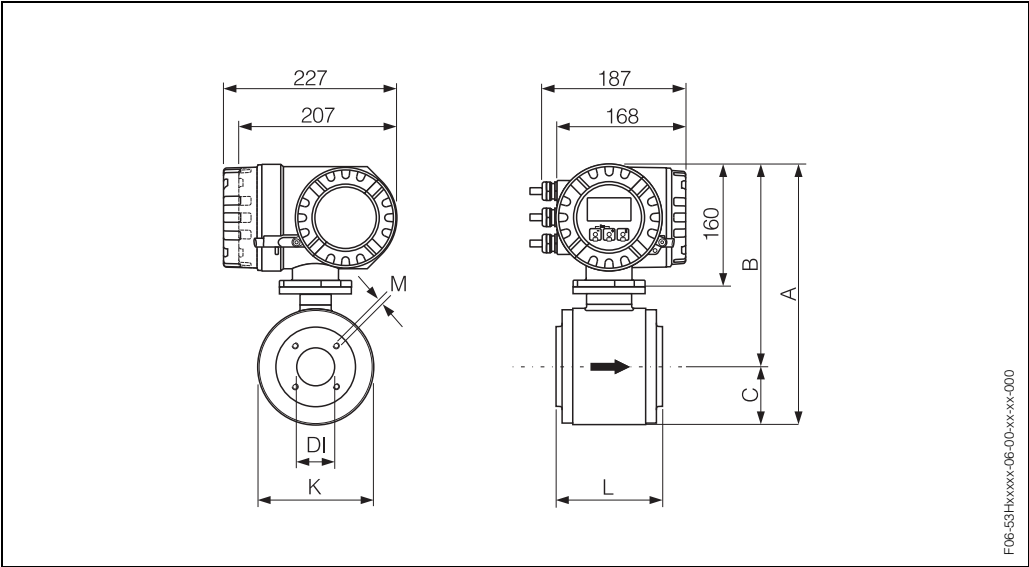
Dimensions Promag H / DN 40...100 (compact version, aluminum field housing)
